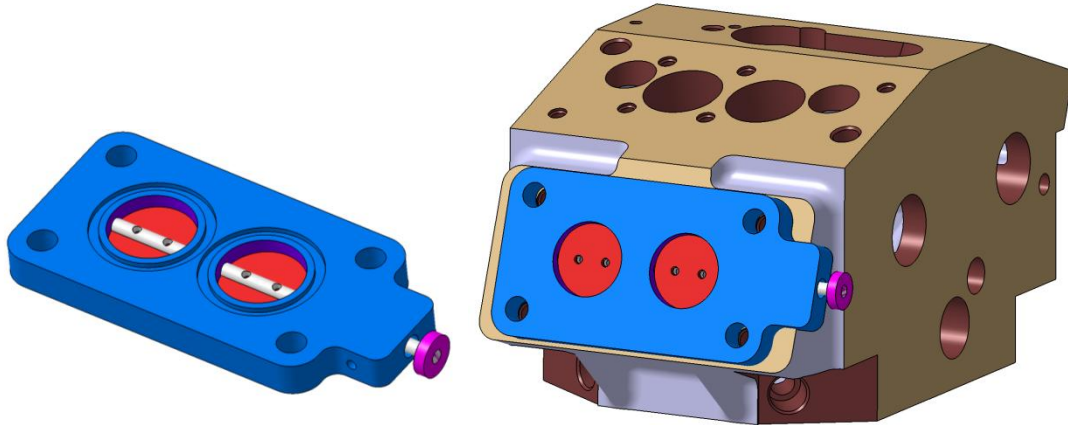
Illustrates how the direct throttle is designed and mounted on the cylinder head.
